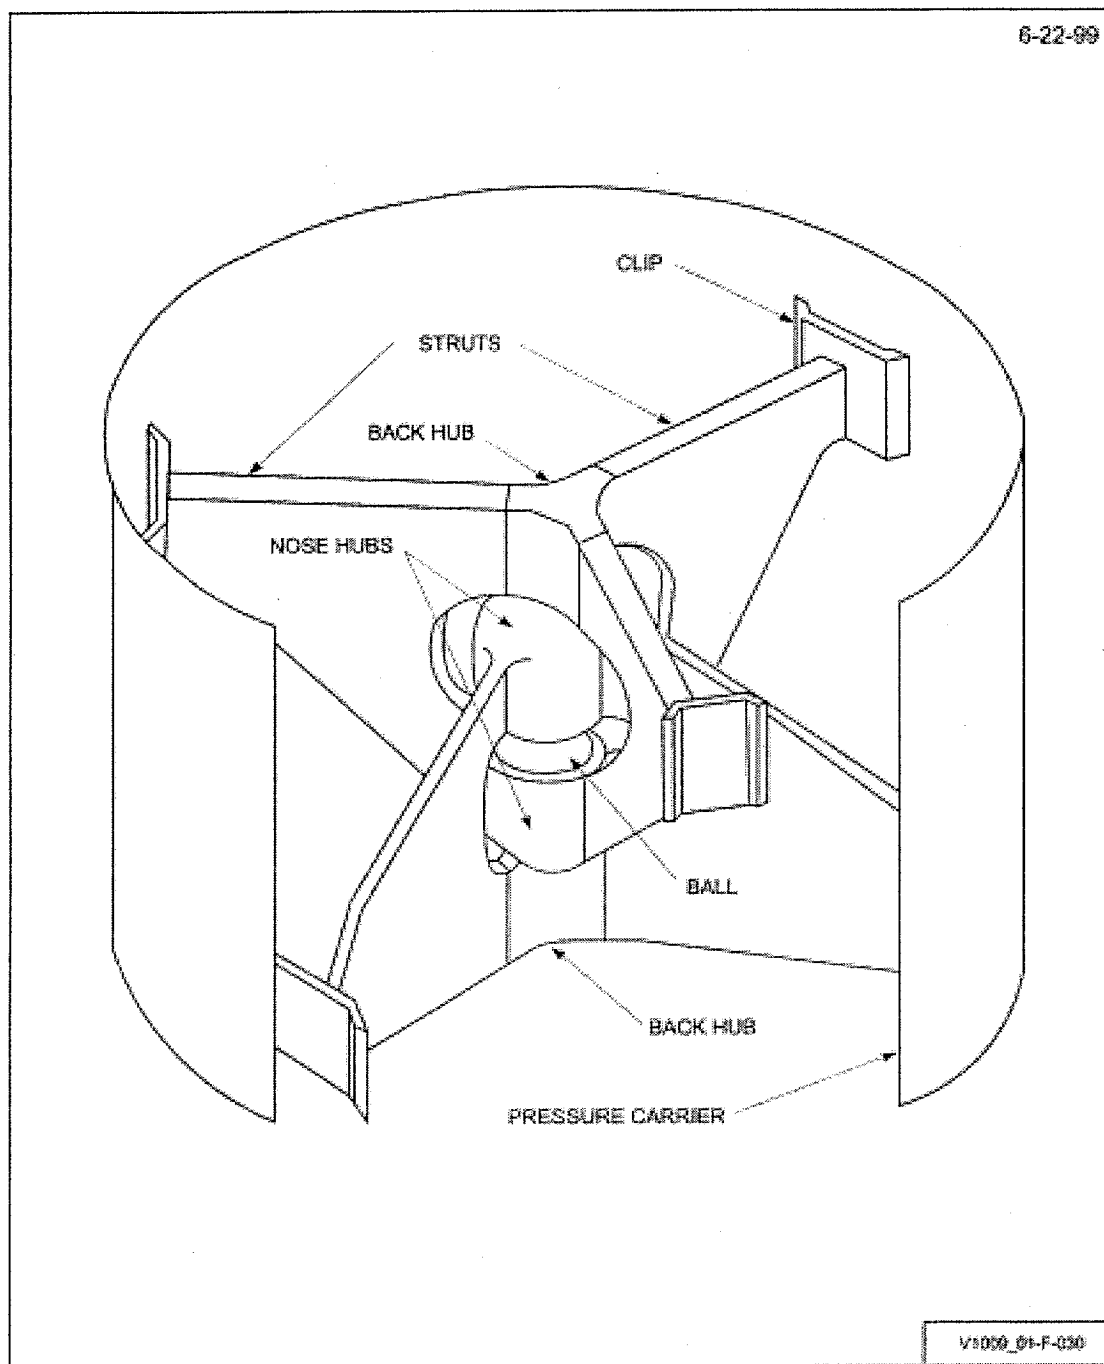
Three Dimensional View; Ball-Strut-Tie-Rod-Assembly (BSTRA)
